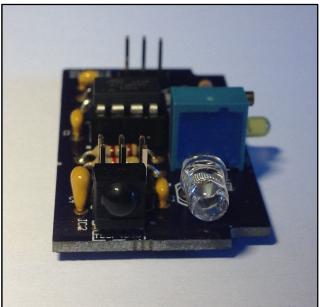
End View of 38kHz Infra-Red Sensor Head PCBs
